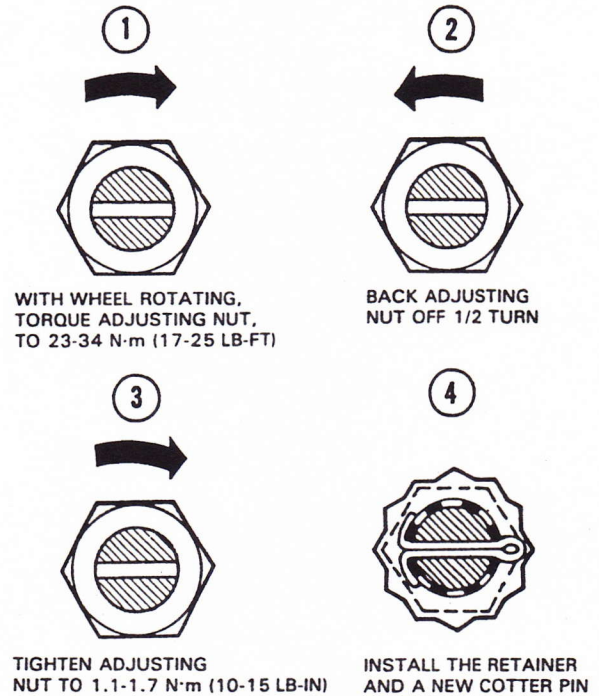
Front Wheel Bearing Adjustment. (Courtesy of Ford Motor Company)
